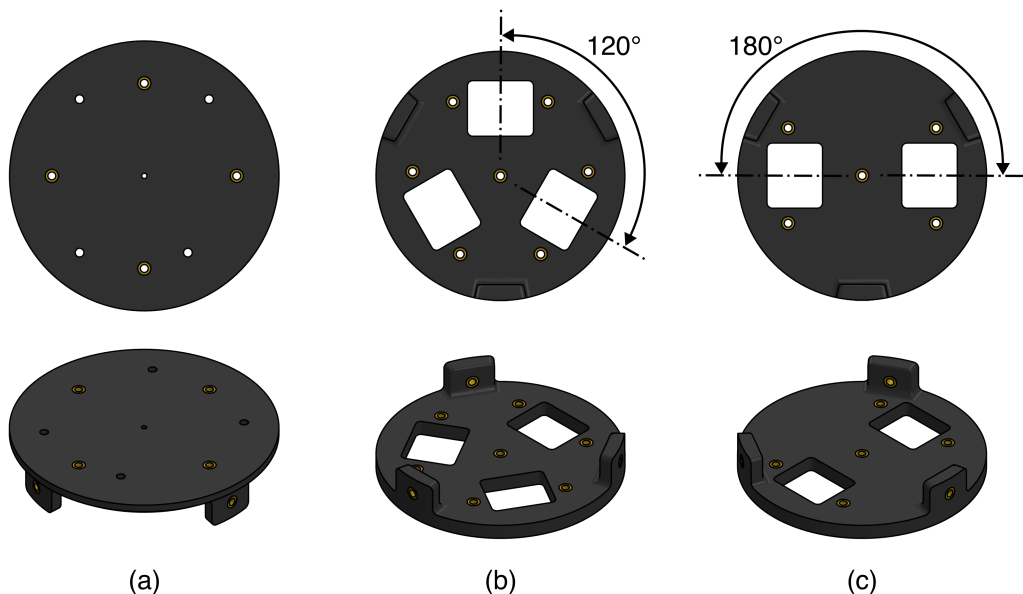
(a) Top plate. Threaded insert holes are used to mount the robotic manipulator flange and connect the plate to the outer structural shell, through holes to secure the electronics stack. (b) Base plate, three fingers configuration. Cutouts and threaded insert holes are used to secure fingers in place and connect the plate to the outer structural shell. (c) Base plate, two fingers configuration.
